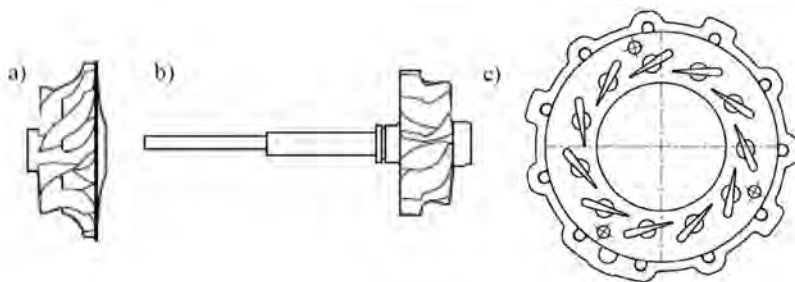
Selected elements of the Garrett 1749V turbocharger: a) impeller, b) shaft with the turbine impeller, c) nozzle guide vane geometry set [6]
